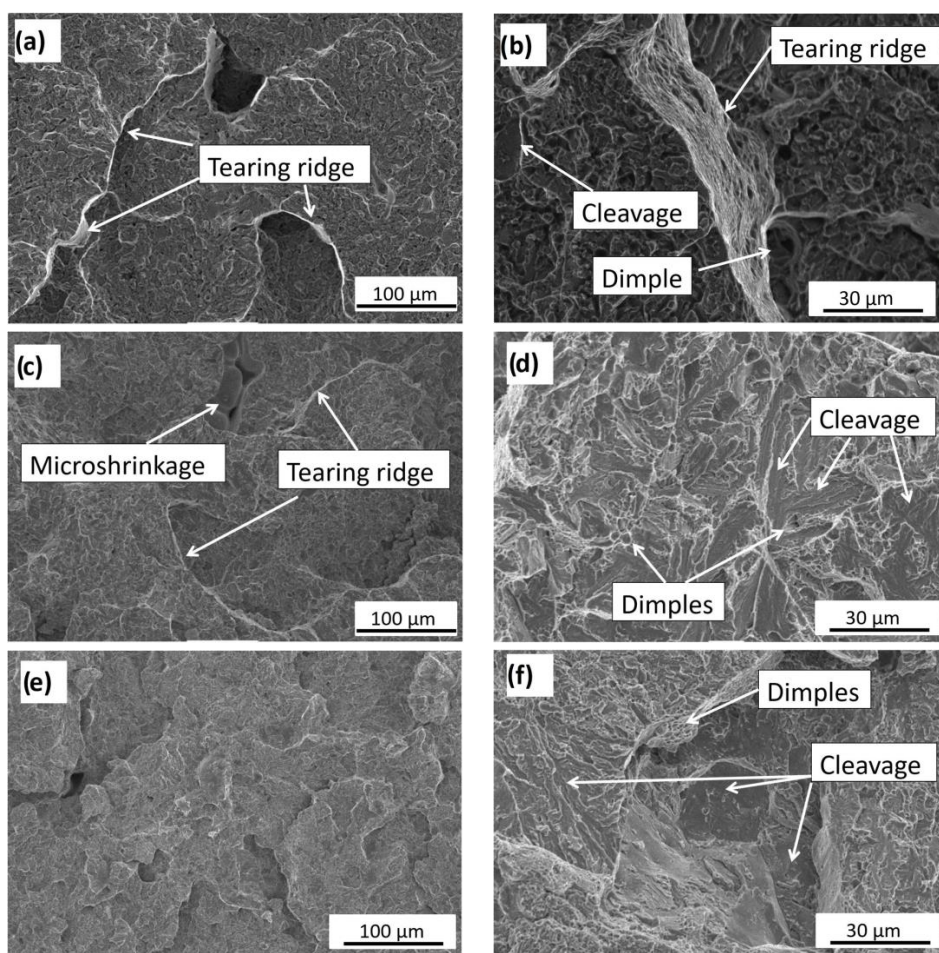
SEM micrographs showing fracture surface of tensile samples: (a,b) transformed at 280 °C, (c,d) transformed at 330 °C, and (e,f) transformed at 380 °C.
